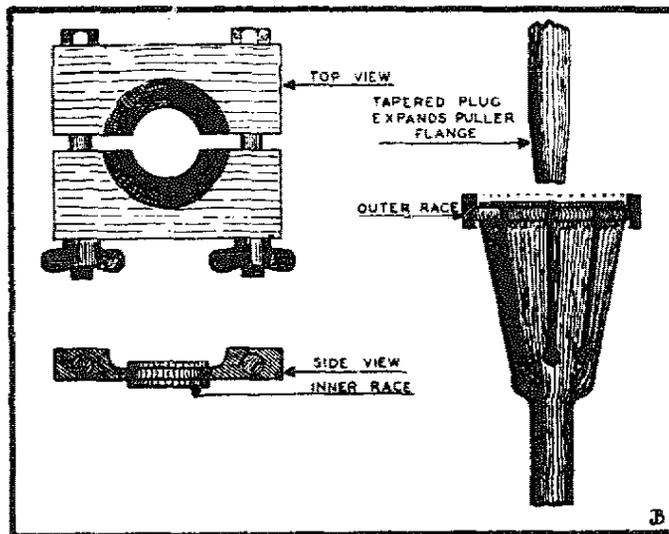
At the left is a puller plate for removing inner ball races from shafts, while at the right is a tool for removing outer ball races from recessed holders
